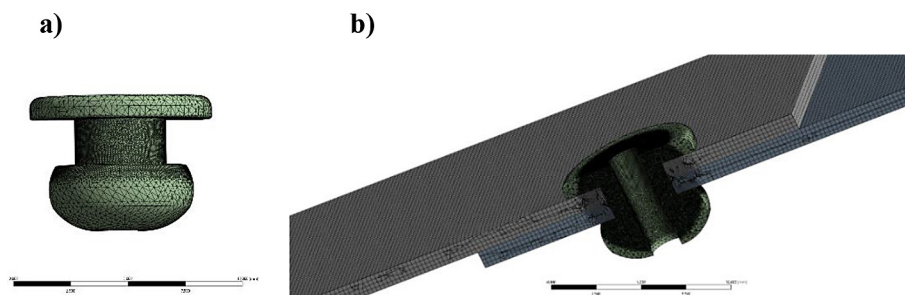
Mesh: a) rivet; b) riveted joint (cross-section)
